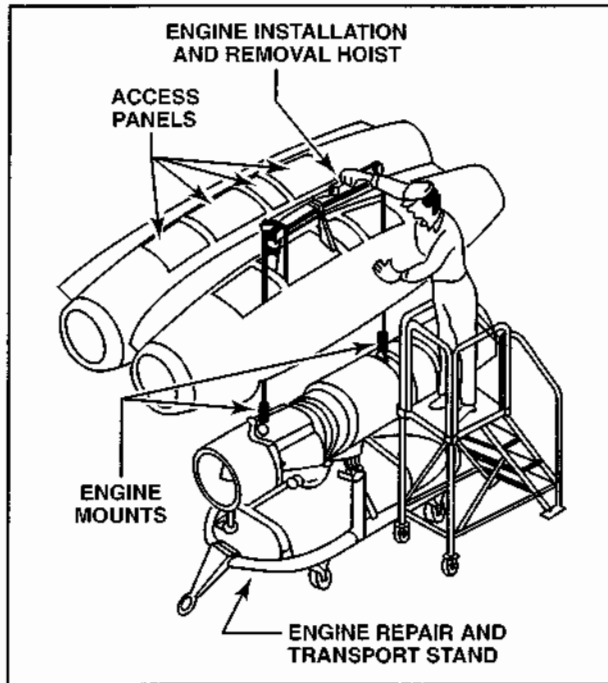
Pod-mounted engines such as those on a Lockheed Jetstar can be removed and lowered onto a transport truck by a two-cable hoist. The hoist attaches to the engine mount structure.
